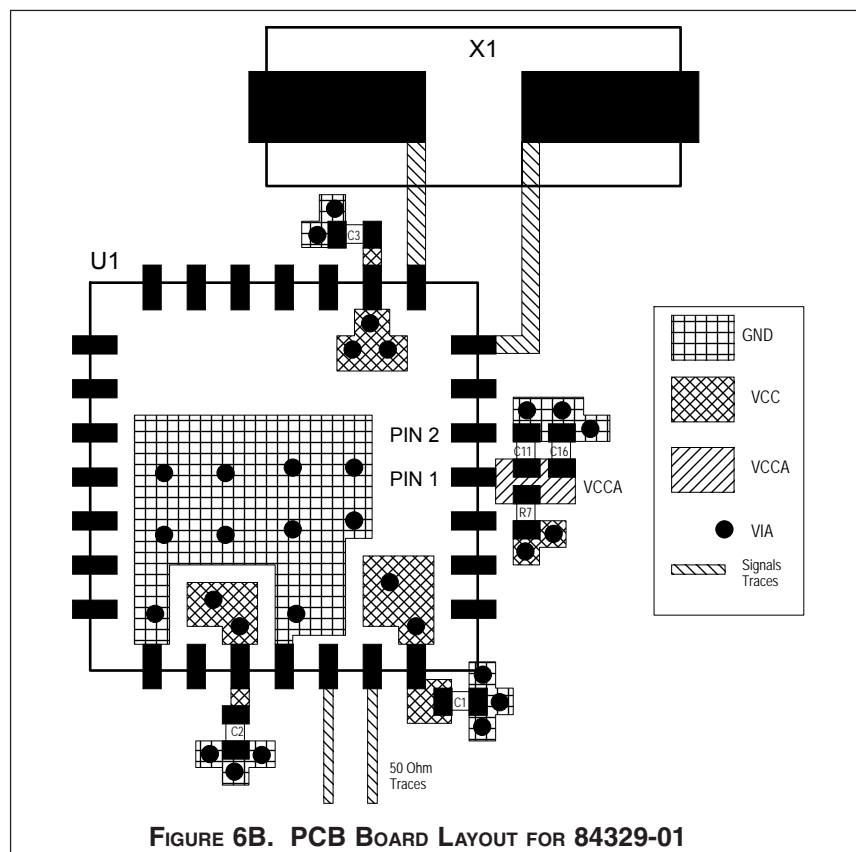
B. PCB BOARD LAYOUT FOR 84329-01
